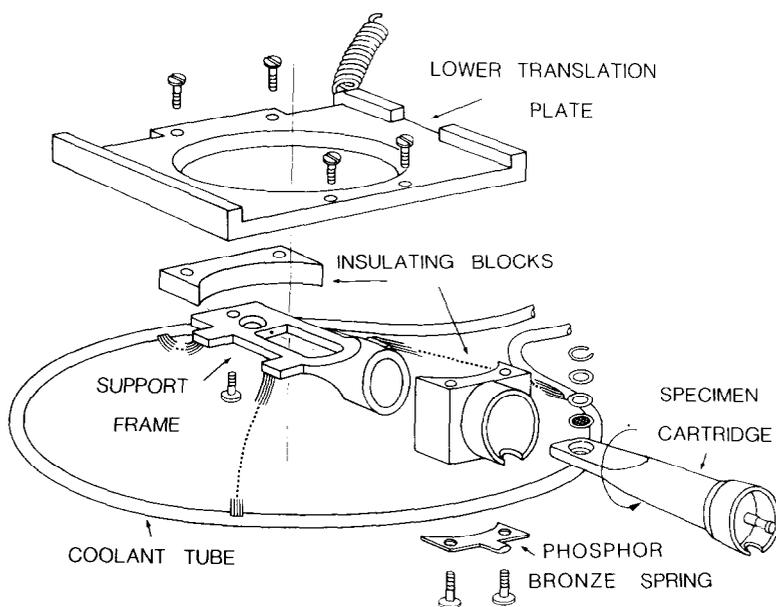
Cold stage assembly and specimen cartridge (exploded view). This drawing shows only those pieces which have been modified from the standard Philips object stage and specimen cartridge.
